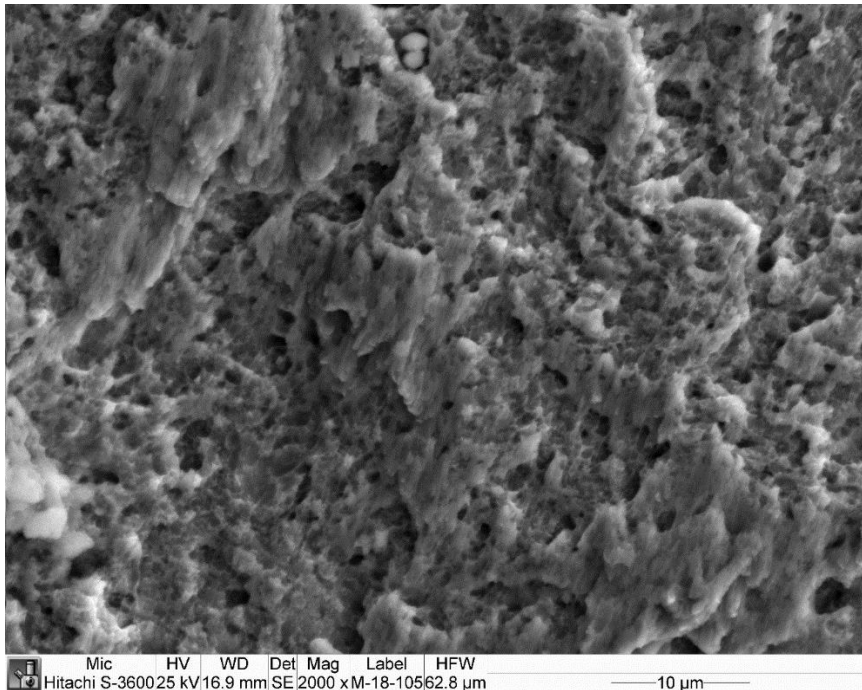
The fracture surface near propeller bolt no. 5. Some places the dimples run in a 20° right direction. Photo: The Norwegian Armed Forces' chemistry and material technology laboratory service (FOLAT)
